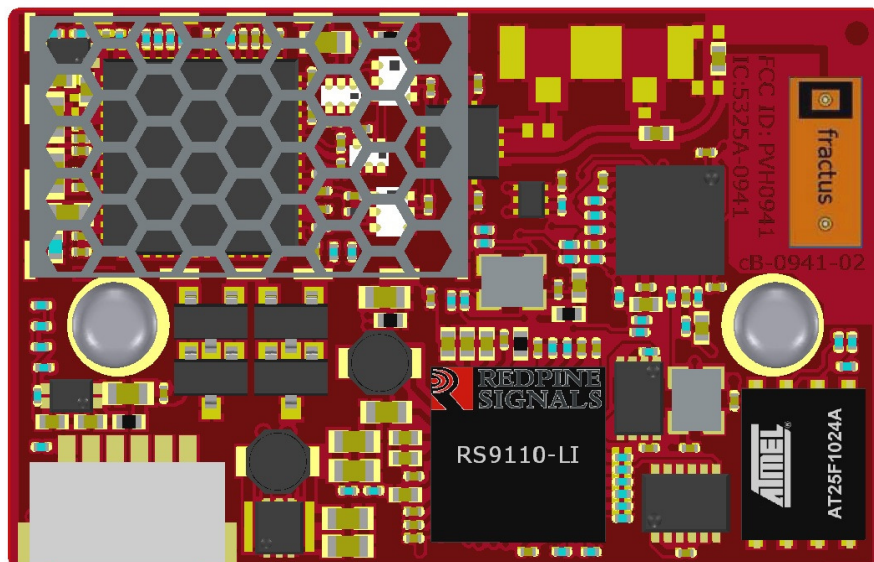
OWS451i FCC/IC identifier printed in the primary side solder mask
